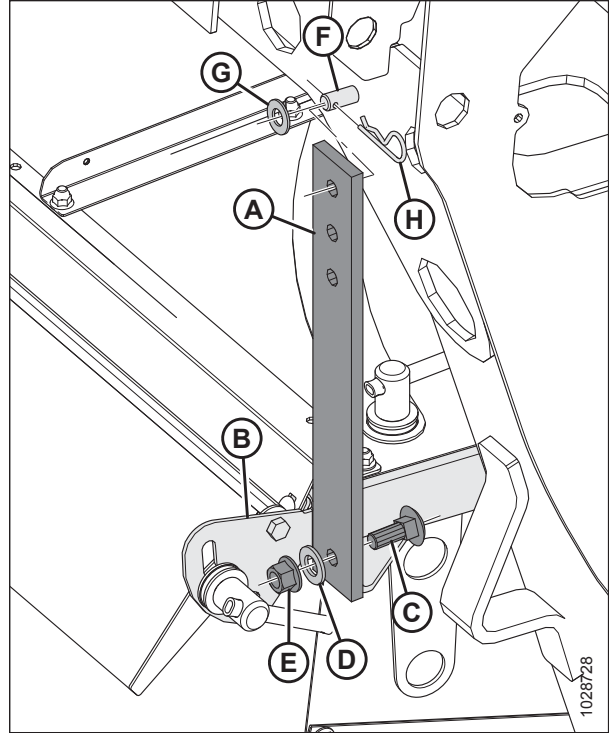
Rubber Strap — Right Side of Forming Shield
